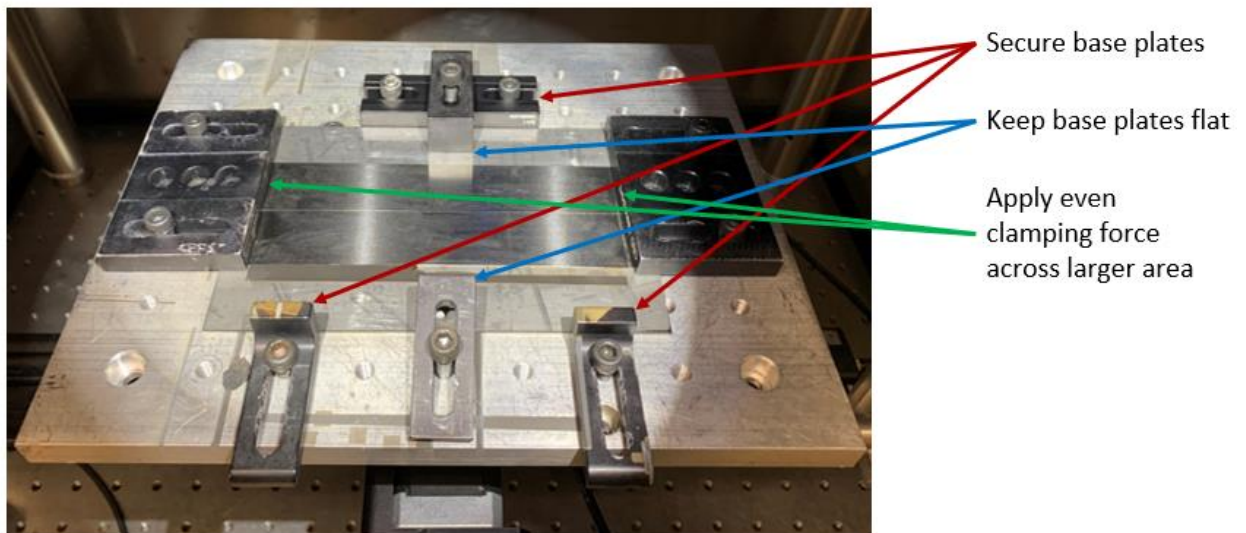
Improved Clamping of the Guide Vane Test Strips During FLSP
